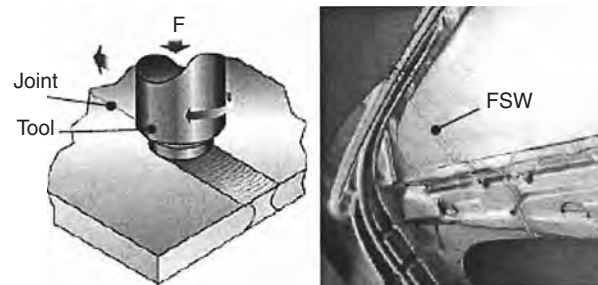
Use of friction stir welding to create a blank. (Source: The Welding Institute.)
